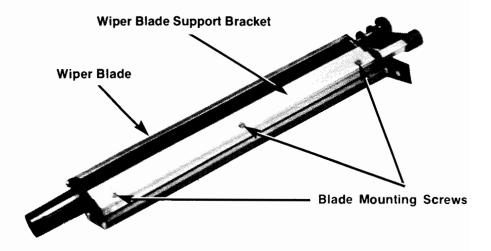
Cleaner Station Wiper Blade (Removed from Printer).
